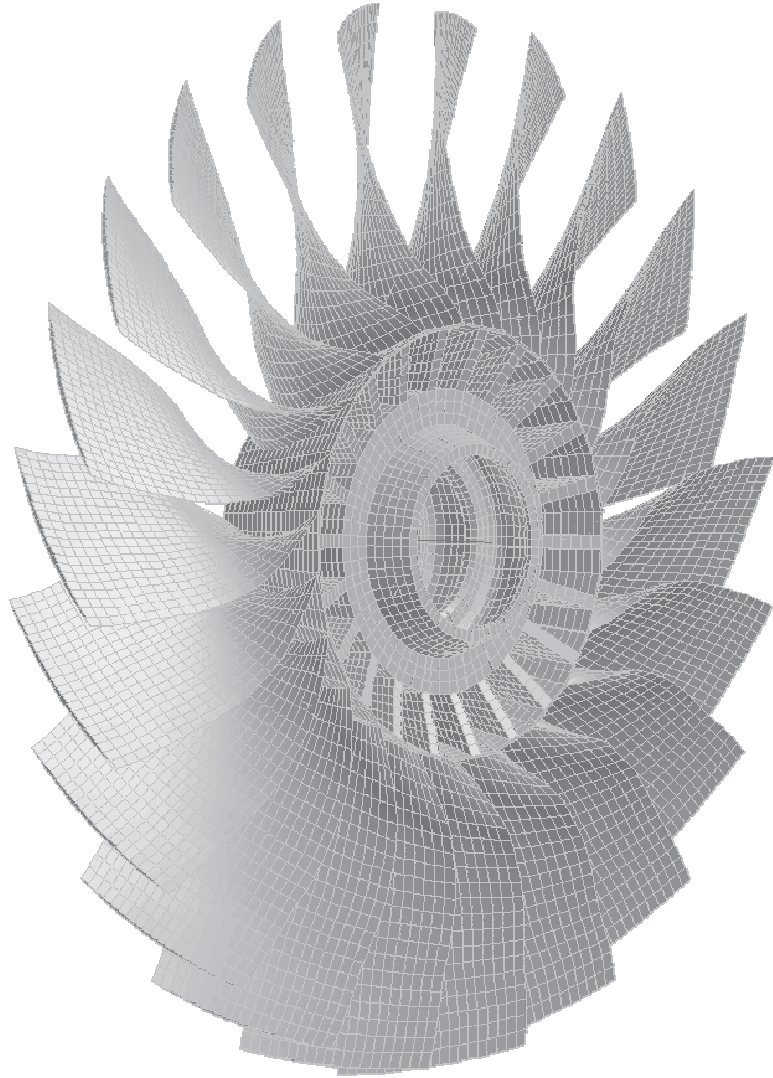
Model of bladed disk assembly. (Model provided by SNECMA.)
